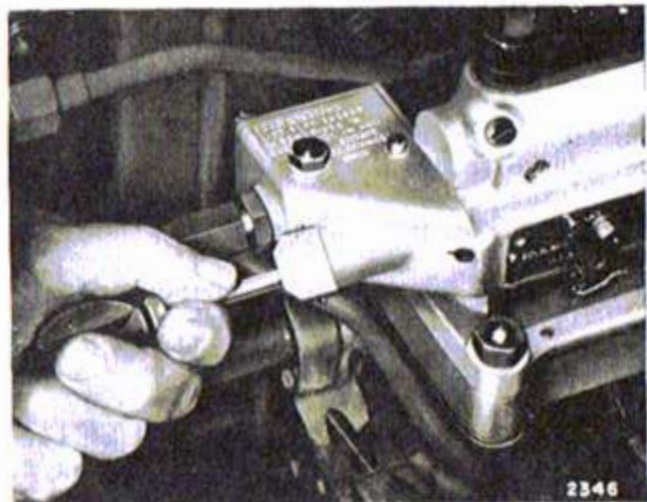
TOOL OPERATED EXCESS FUEL DEVICE
